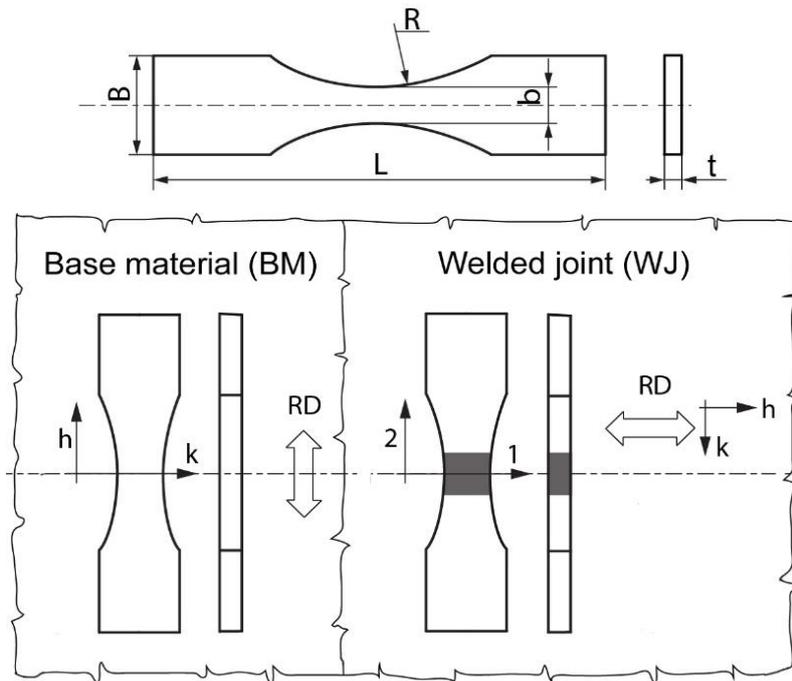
The geometry, the location and the designation of the HCF test specimens for base materials (BM) and welded joints (WJ).
